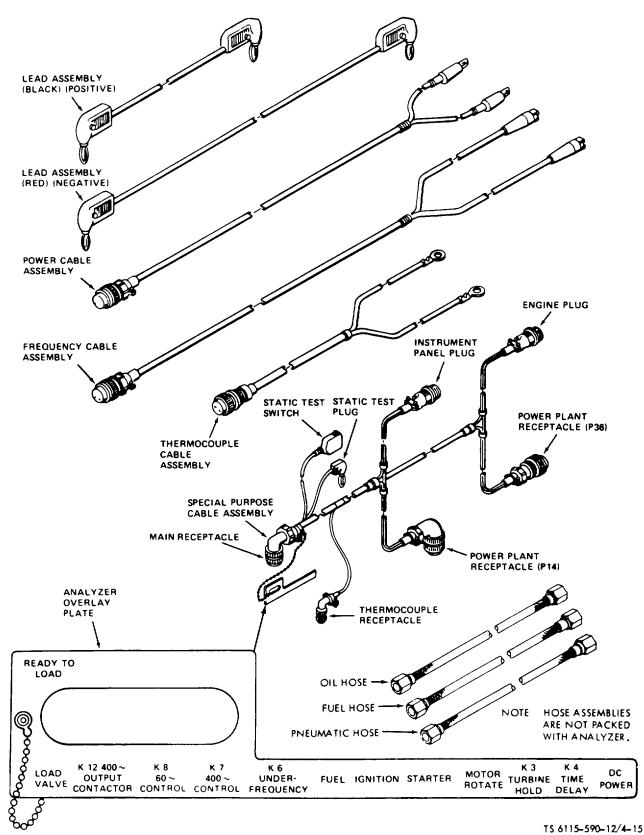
Analyzer Cables and Special Purpose Cable Assembly. (TS 6115-590-12/4-15).
